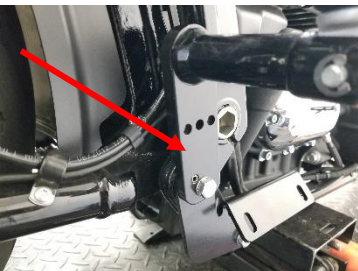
right peg relocater 2018 fat boy and breakout only.
